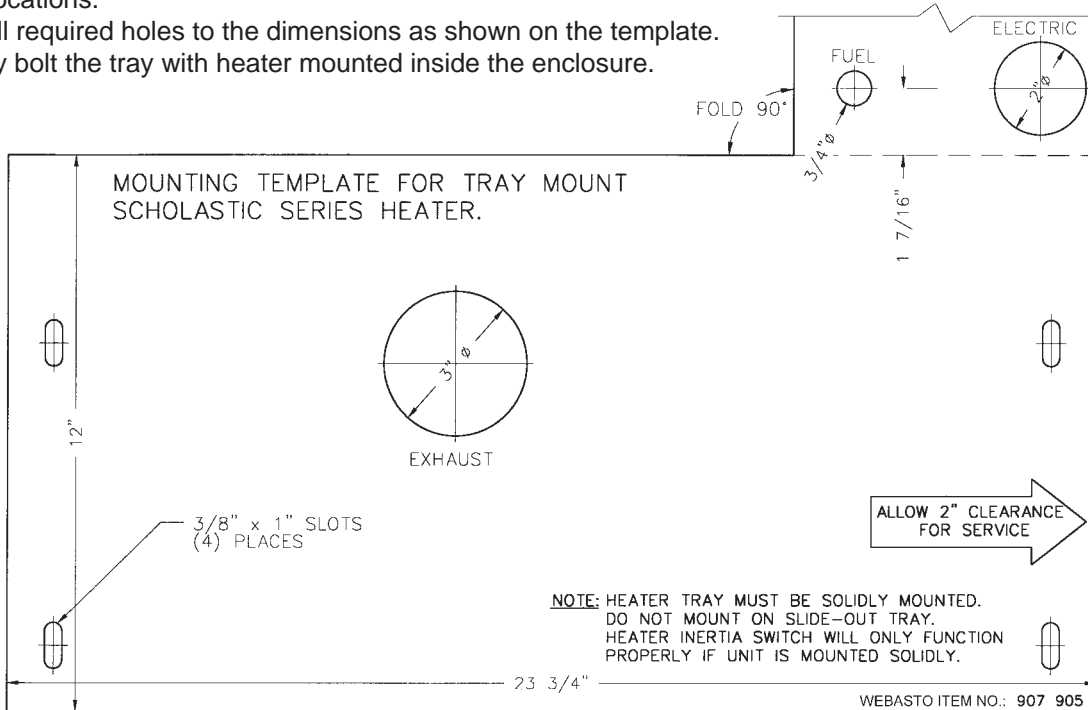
Tray Mount Template (Supplied with Heater Kit)
